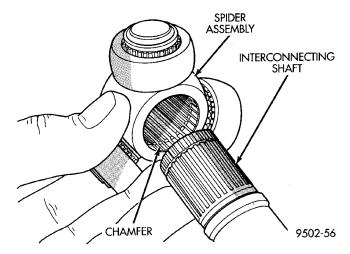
Spider Assembly Installation on Interconnecting Shaft
